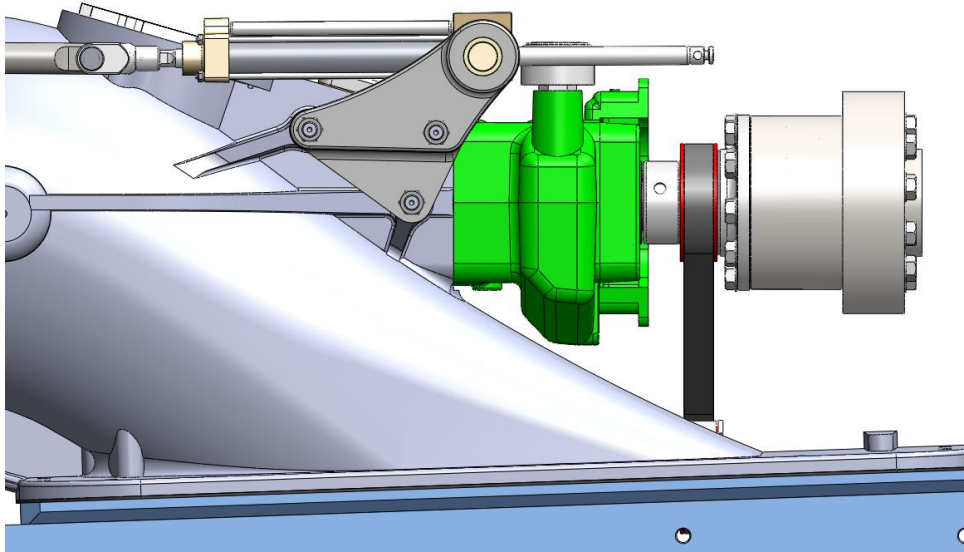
Close up View of the Cantilevered Thrust Bearing Housing
